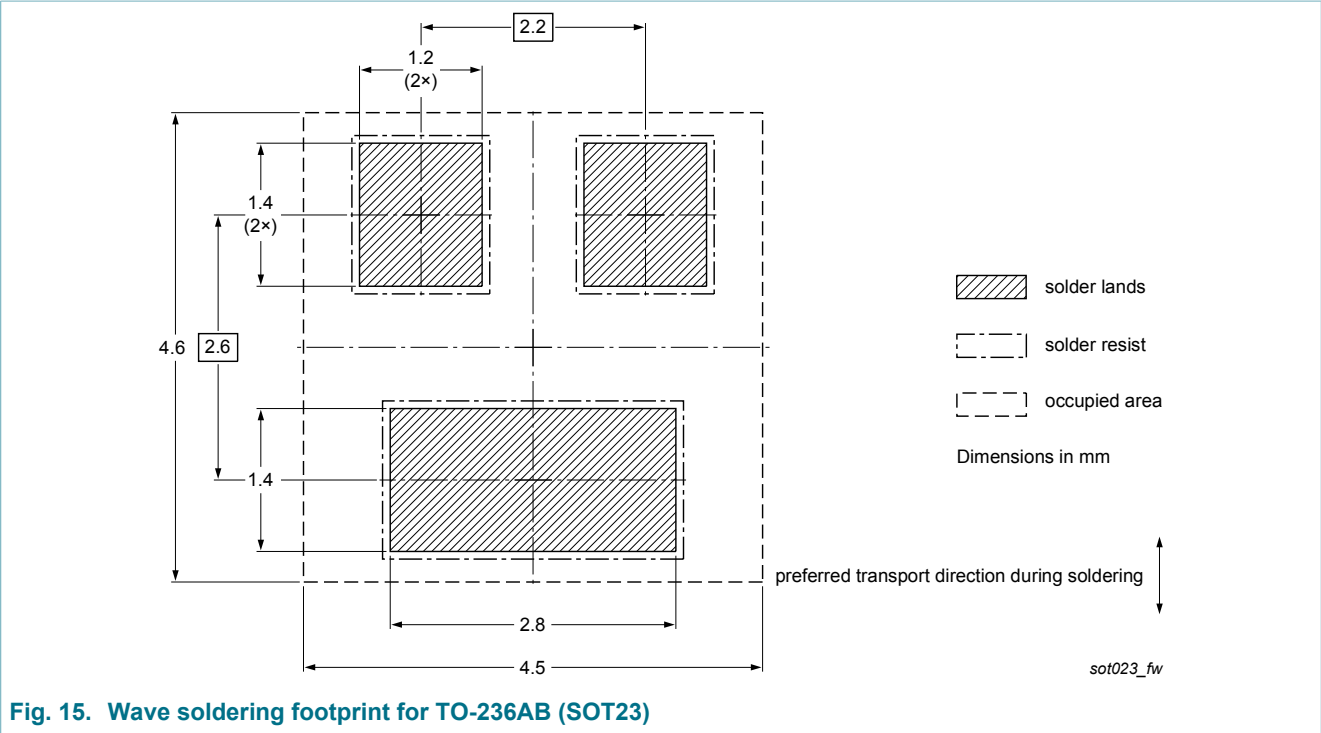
Wave soldering footprint for TO-236AB (SOT23)
